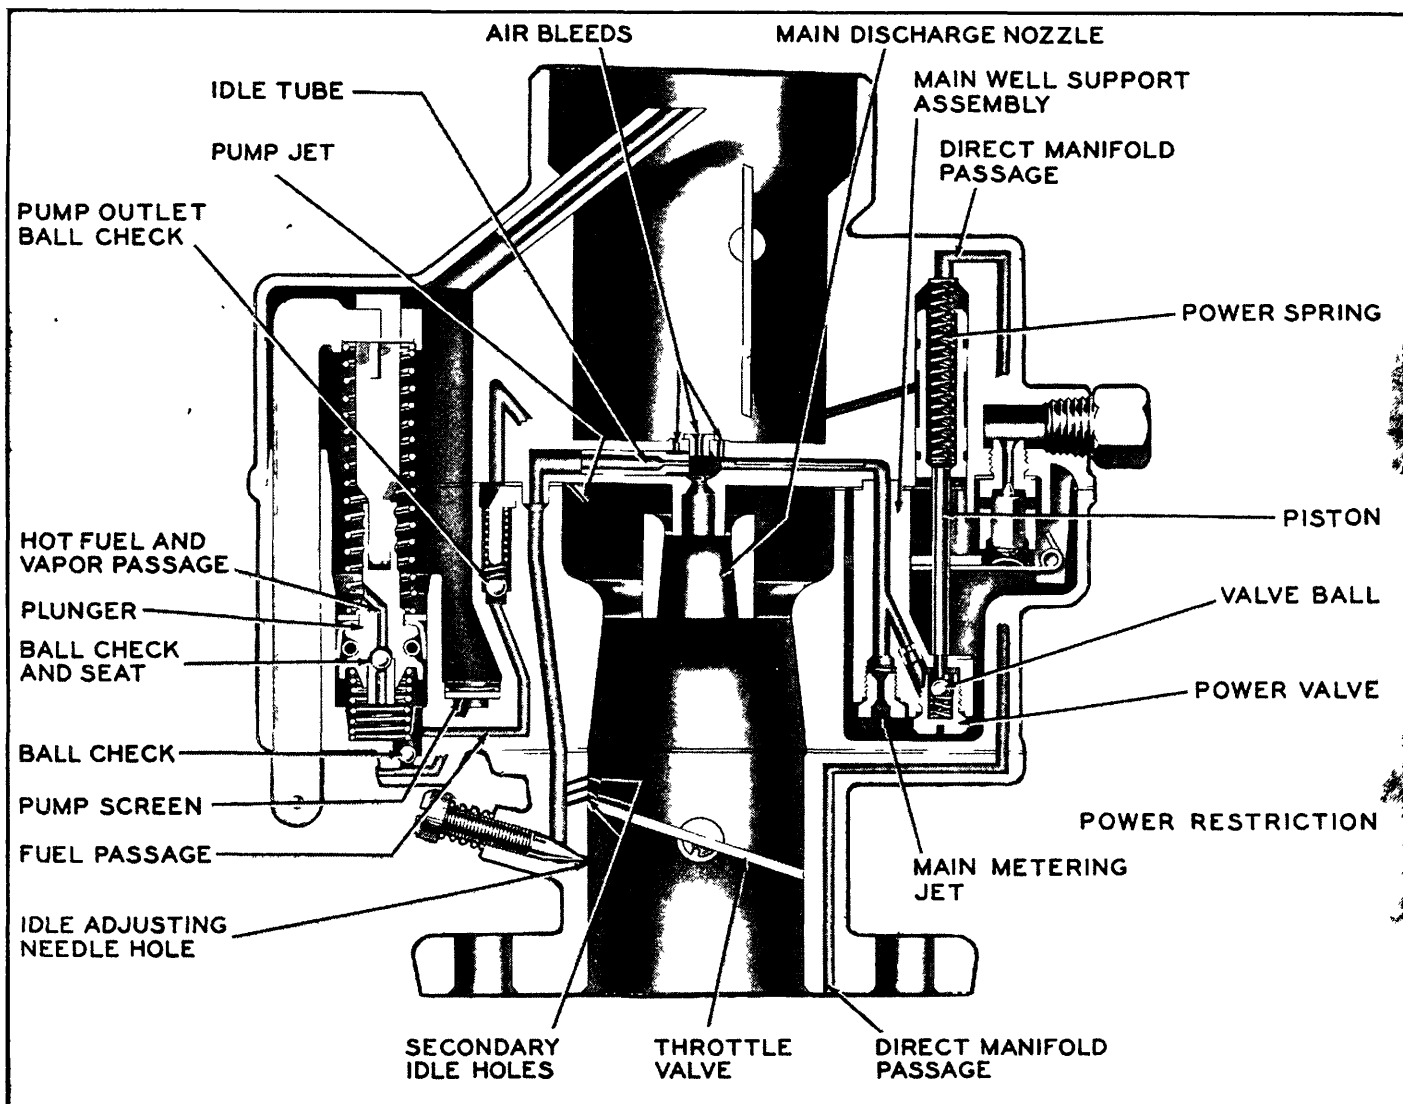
AA Rochester Model B carburetor. Chevrolet 1949-52 without automatic choke
